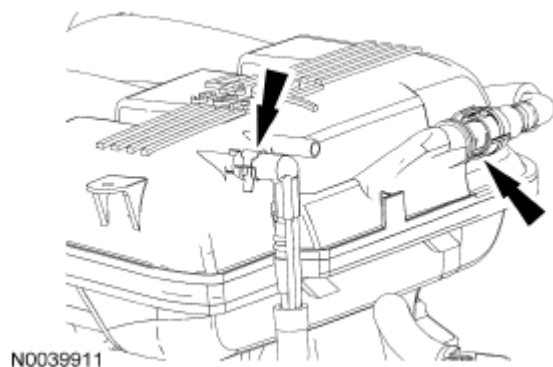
Locating Vacuum And Positive Crankcase Ventilation Hoses
